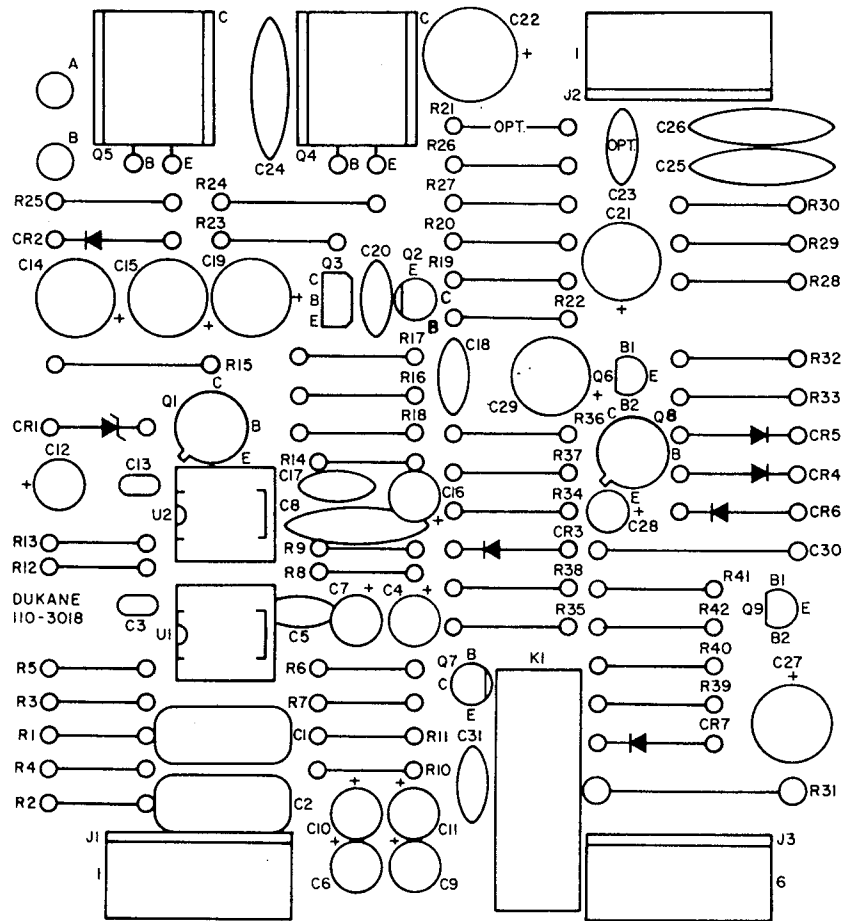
Parts Layout on 110-3018 4W Amp. & Tone Module
